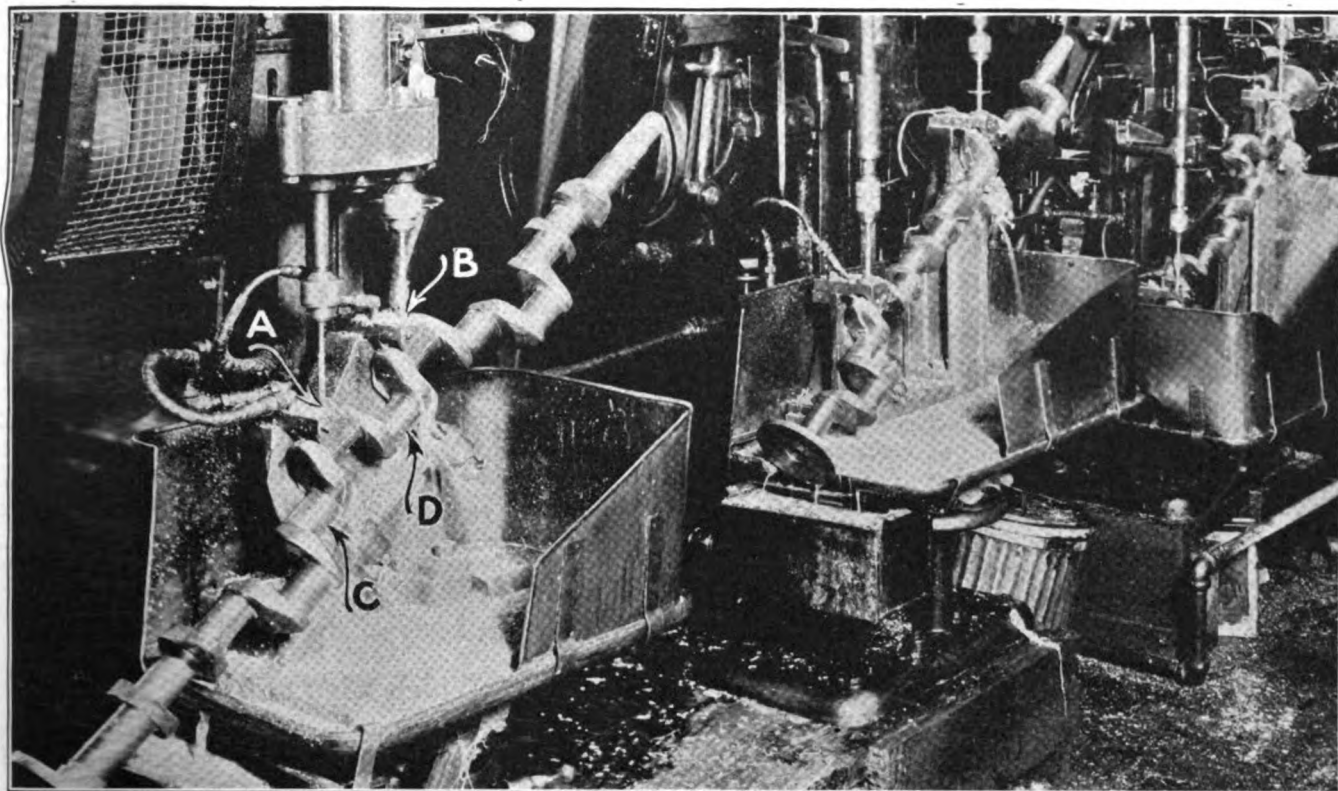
DRILLING THE OIL DUCTS IN THE BEARINGS
